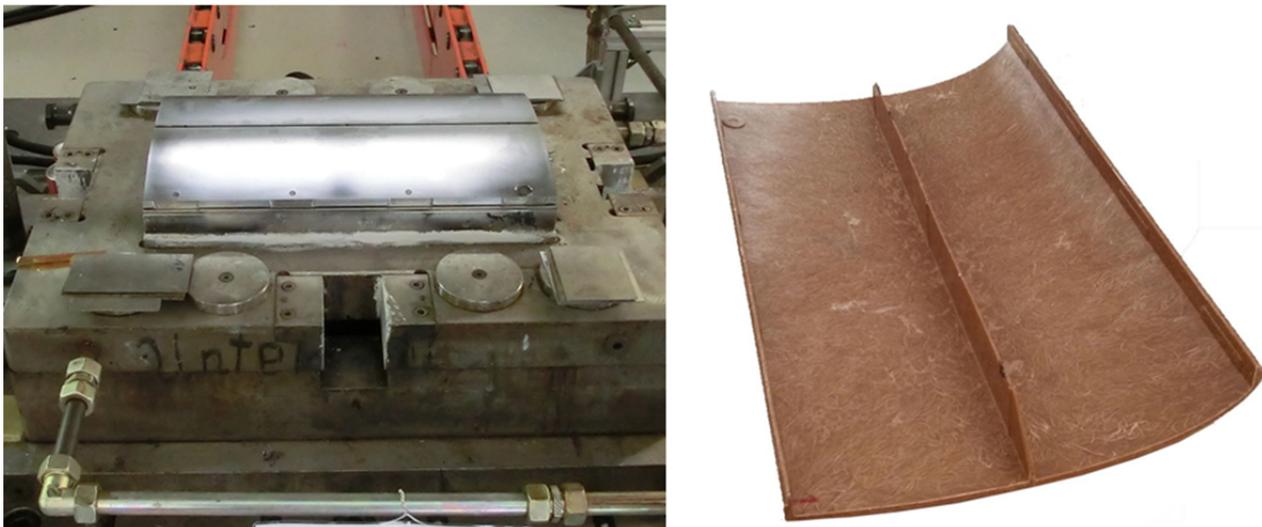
Institut für Verbundwerkstoffe GmbH SMC compression molded automotive spoiler
